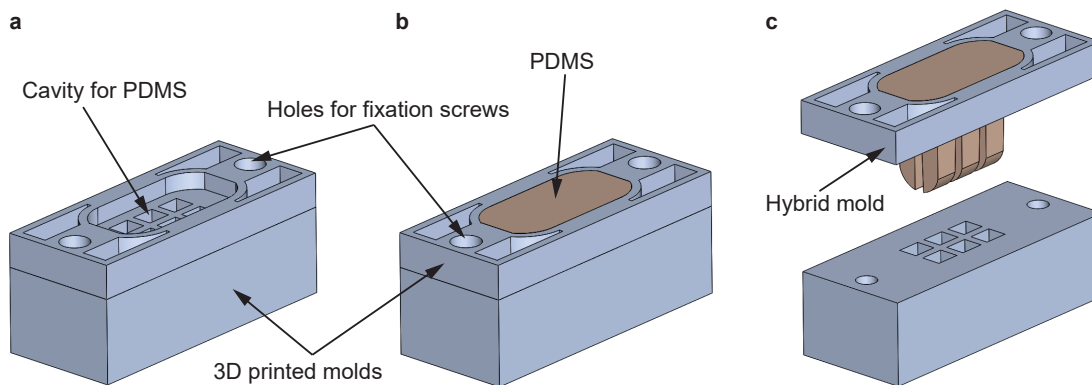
Top mold fabrication. a,b,c, Production of the top hybrid 3D printed-PDMS micro-mold for the molding of PGS and POMaC. 3D printed molds before the filling with PDMS (a), after the filling with PDMS (b), and after the opening of the molds (c).
